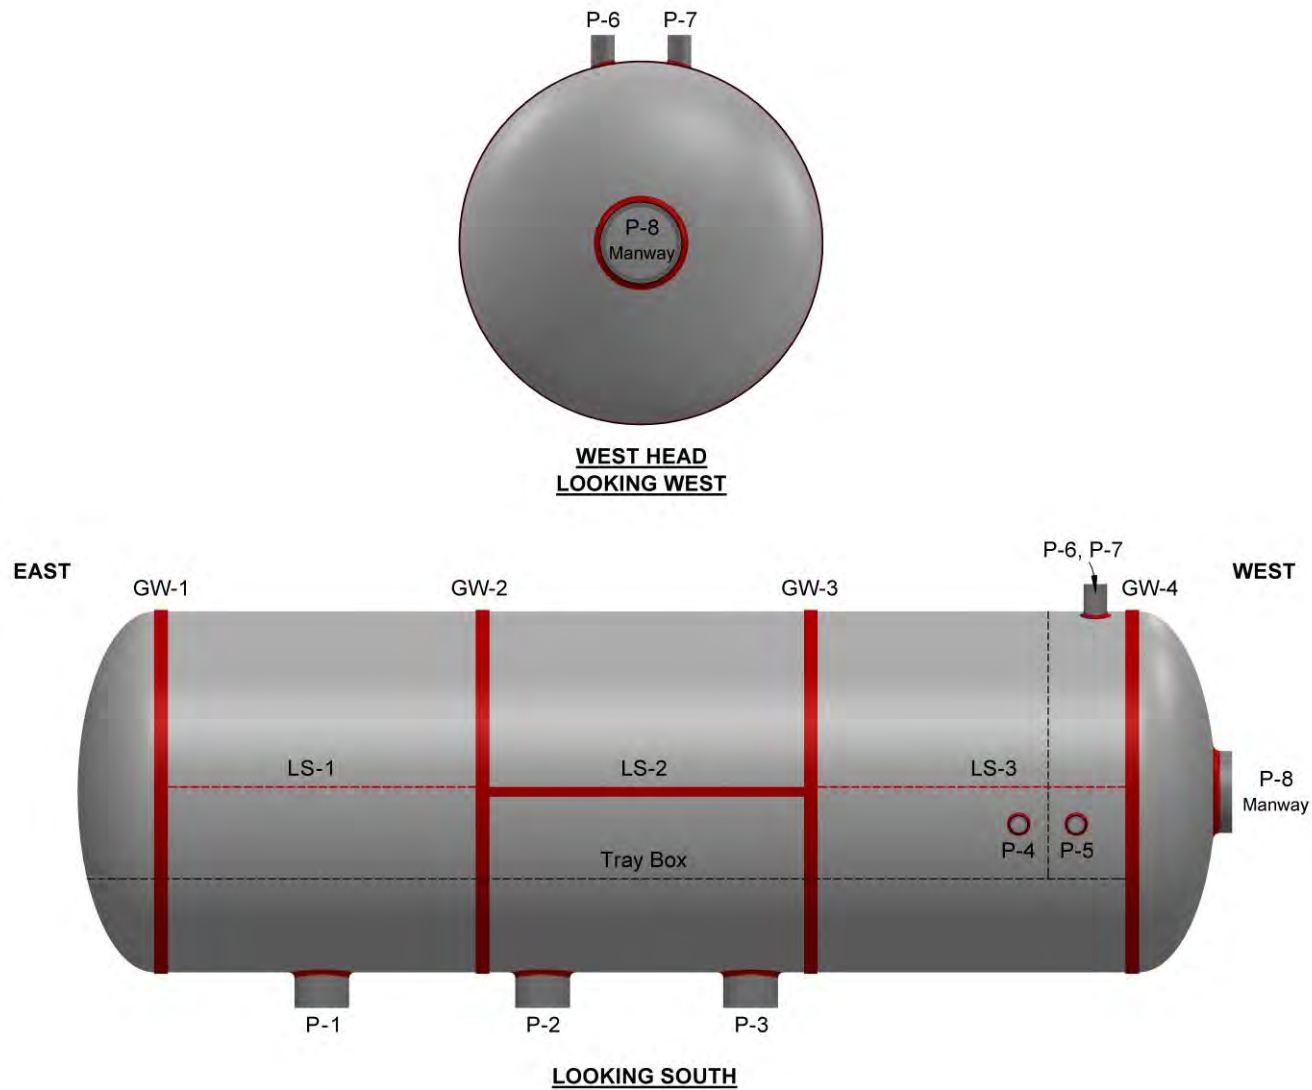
Sketch of the deaerator heater, identifying the inspection locations.
